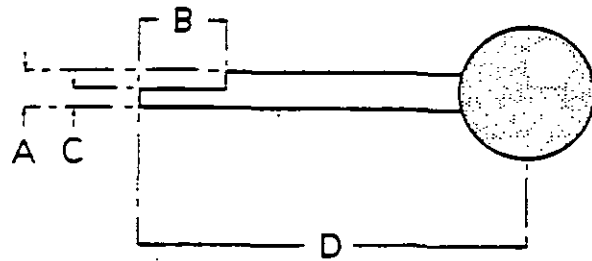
TOOL FOR COMPRESSING DETENT SPRINGS
